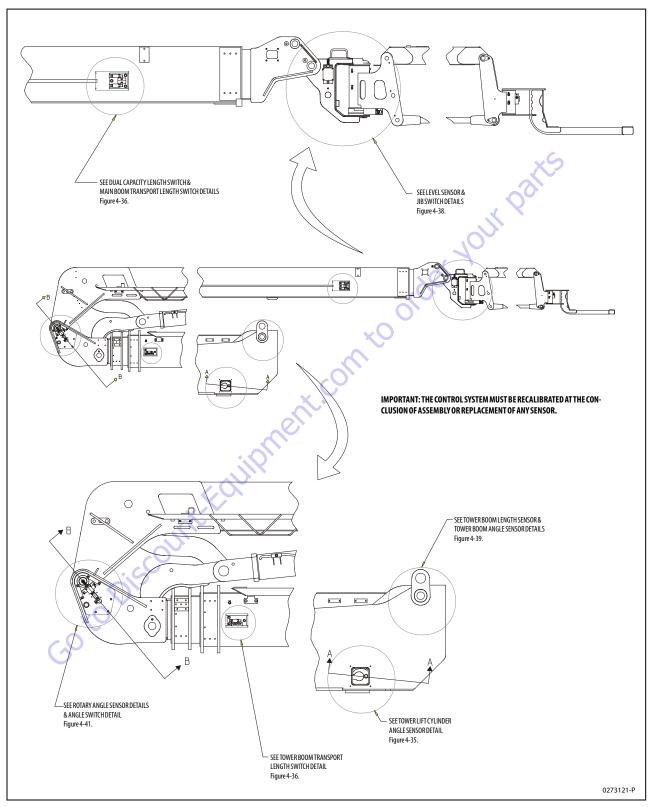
Boom Sensor Locations Overall View - Sheet 2 of 2
